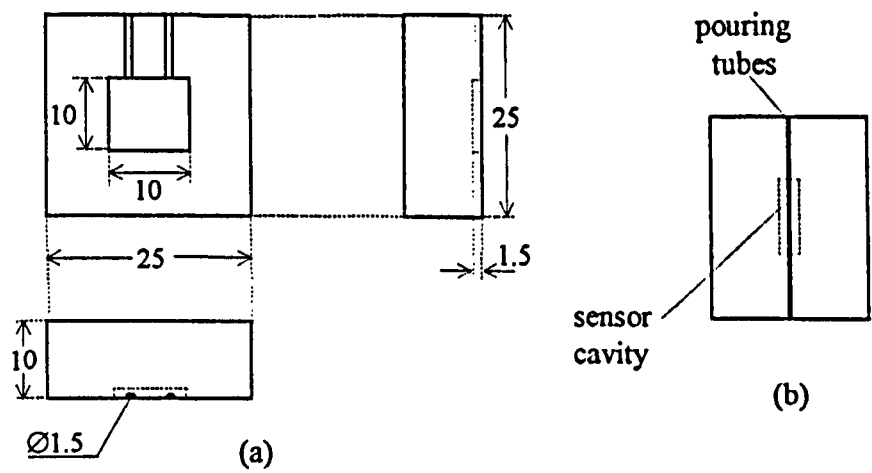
(a) Dimensions of each wax mould part (mm). (b) Two identical wax parts are used to form the sensor mould.
